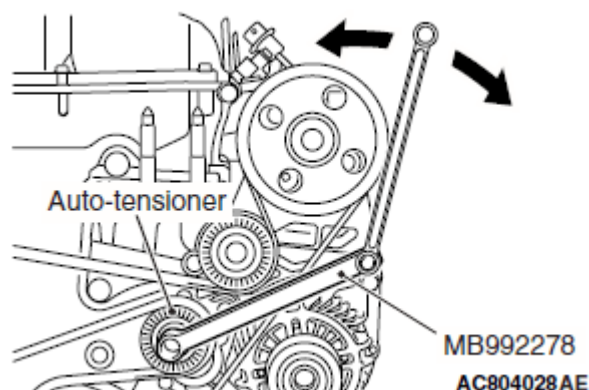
Turning Auto-Tensioner Using Special Tool MB992278
